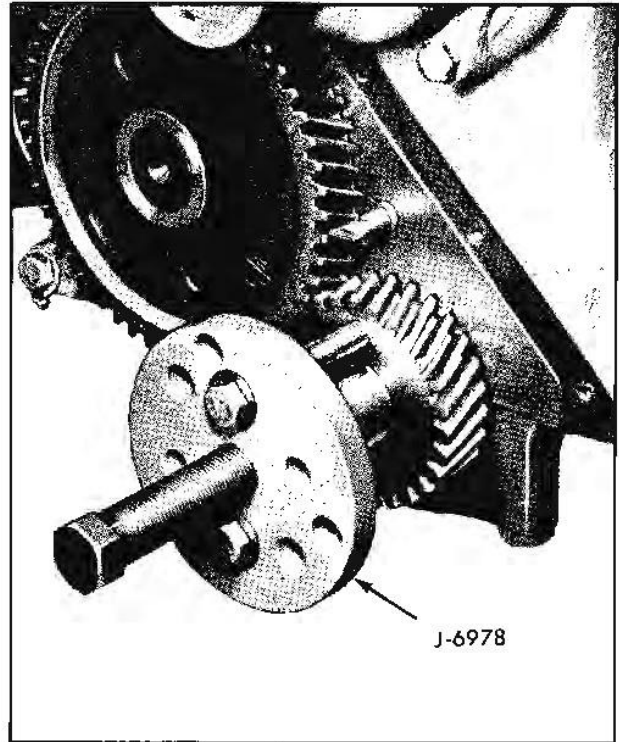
Tool J-6978 Installed for Removing Crankshaft Timing Gear
